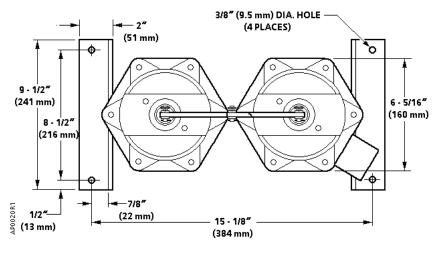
Damper or Inlet Vane Mounting Hole Locations (Top View).
